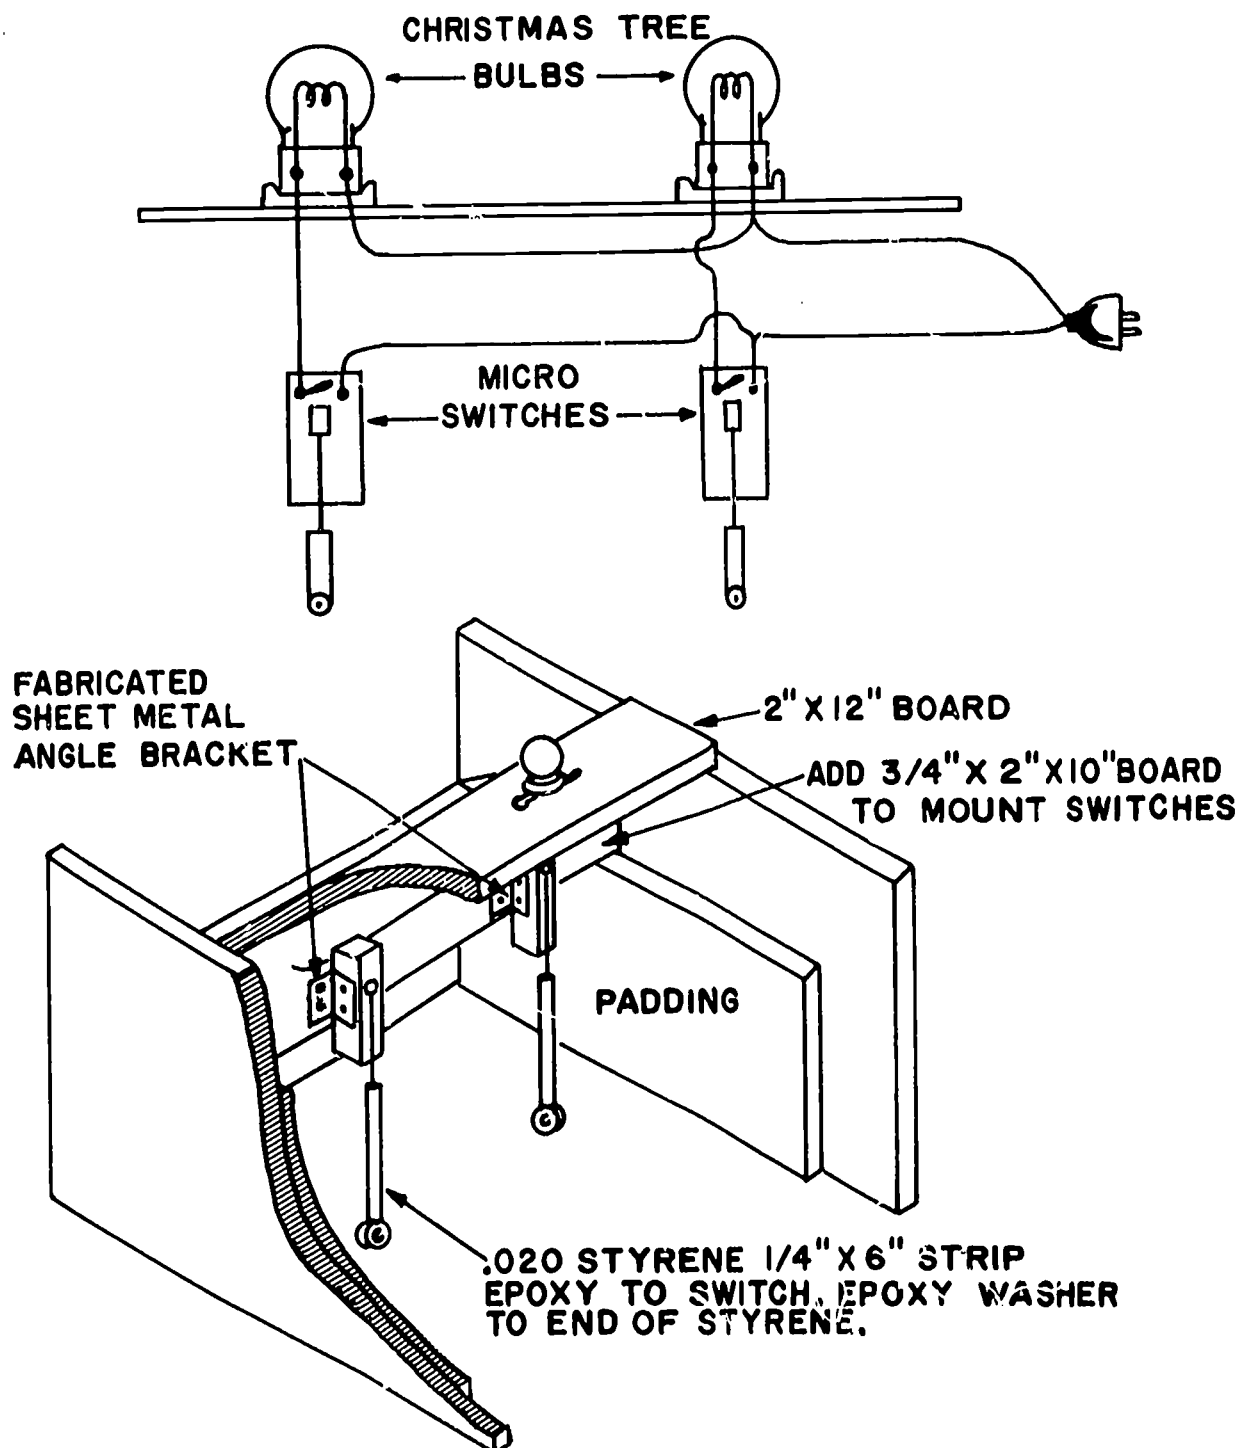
Electrical Trip-Mechanism Schematic and Assembly
